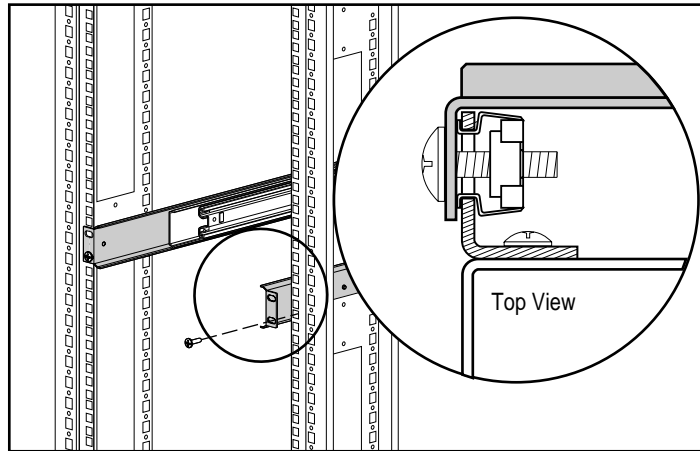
Cage nut and back of mounting bracket assembly installed
